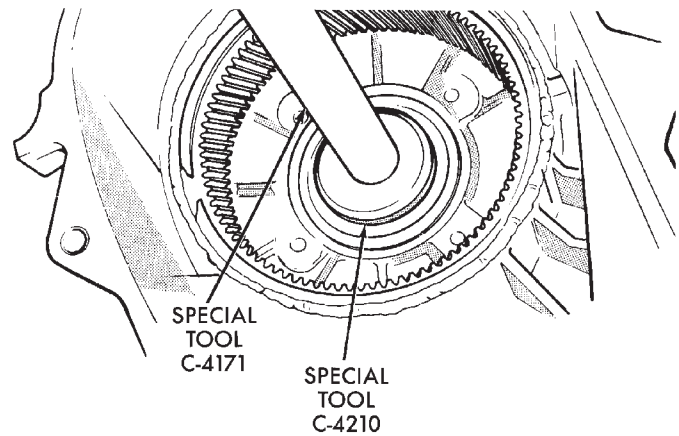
Output Shaft Rear Bearing Installation Depth
